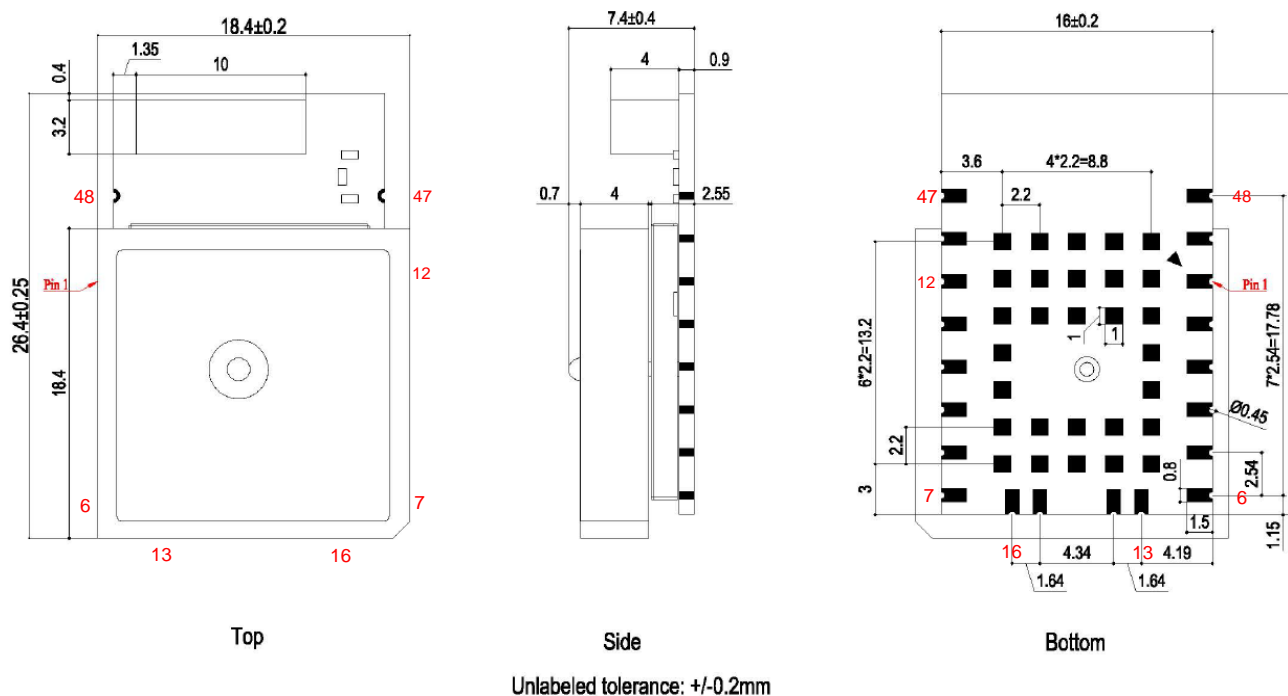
L89 (HD) Top, Side and Bottom View Dimensions
